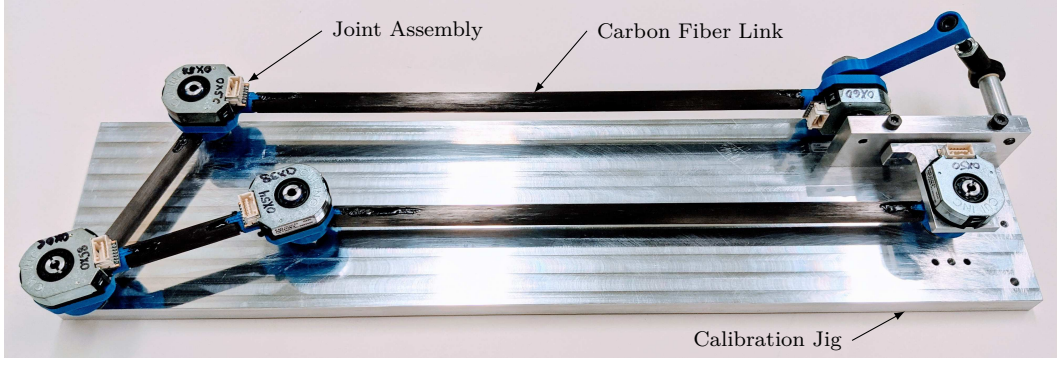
Example of a 5-joint measuring arm prototype mounted on an assembly and calibration jig.
